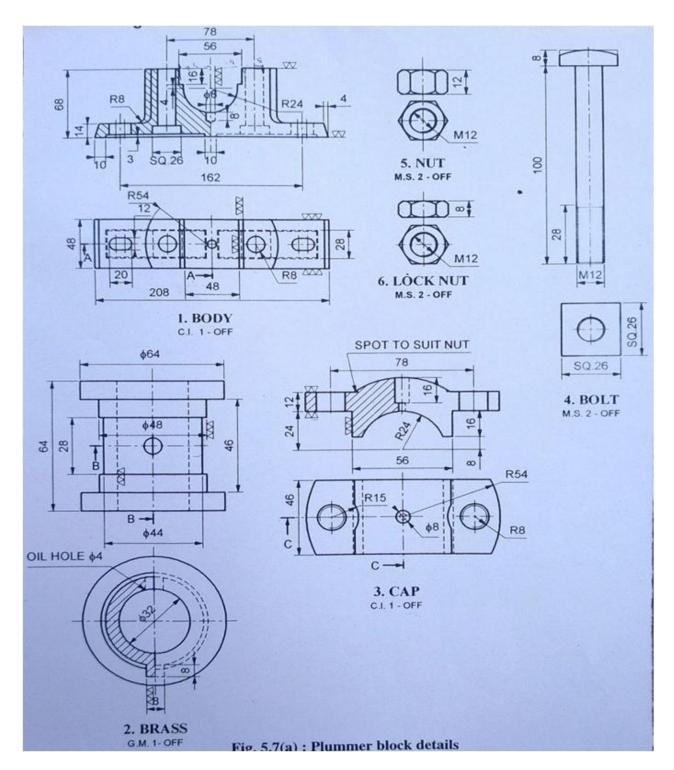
Shows the details of pedestal bearing plumber block. Draw the following views of the assembly. a) front view sectional b) top view outside c) prepare bill of material
